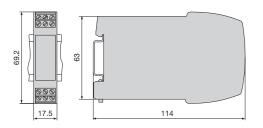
The SINEAX B 812 in a top-hat rail housing P12/17 mounted on a top-hat rail (35 \times 15 mm or 35 \times 7.5 mm to EN 50 022) with fixed connection screw
